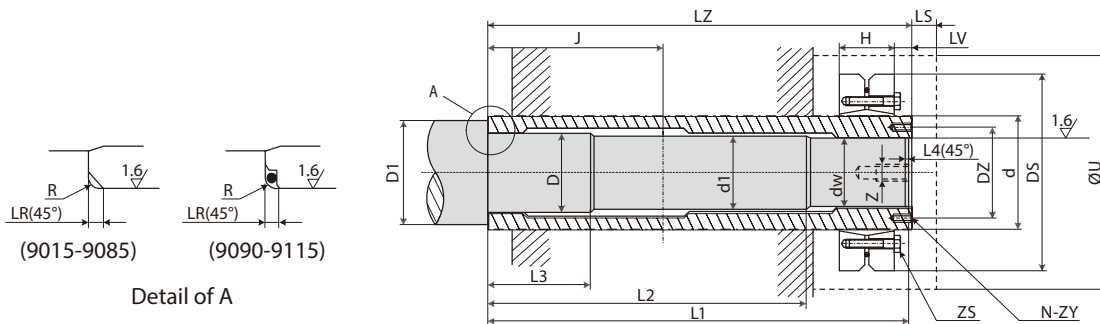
Diameters Relating Hollow Shaft, Driven shaft
